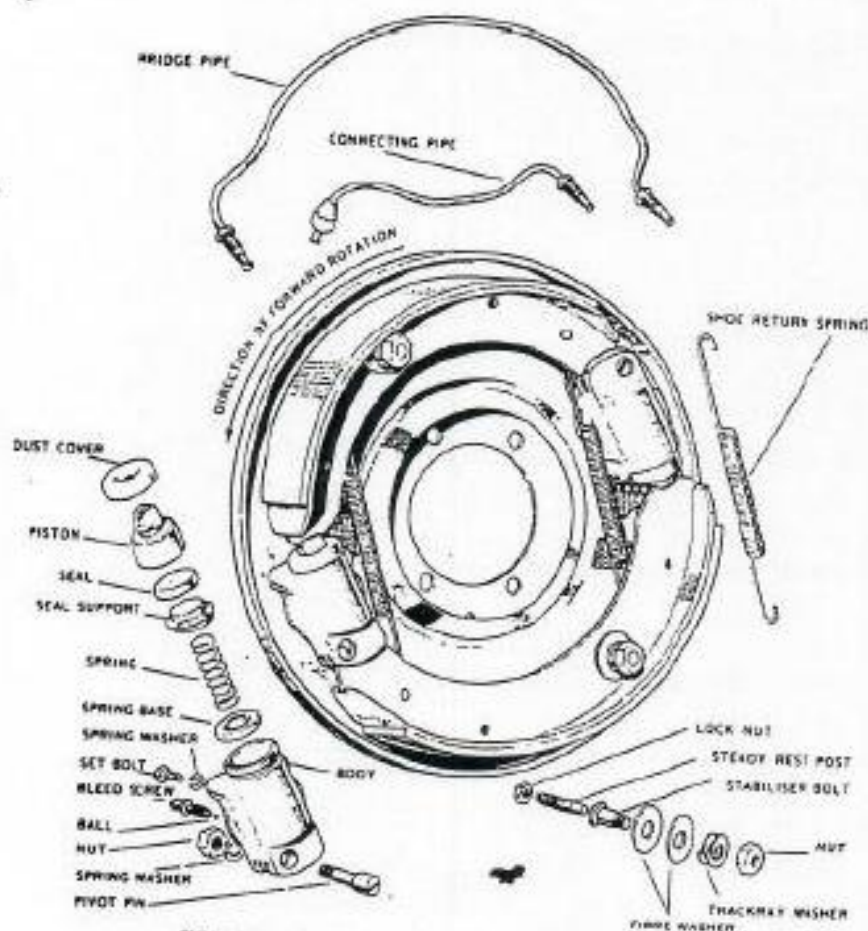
Front brake assembly (Mark VII — left-hand side).
